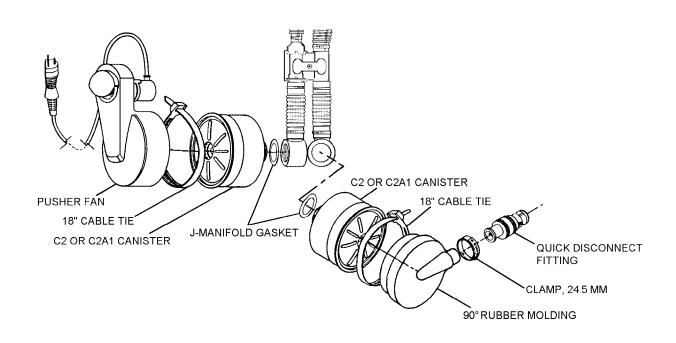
Assembling Pusher Fan and Oxygen Delivery Subassemblies to J-Manifolds - (V)4 Only
